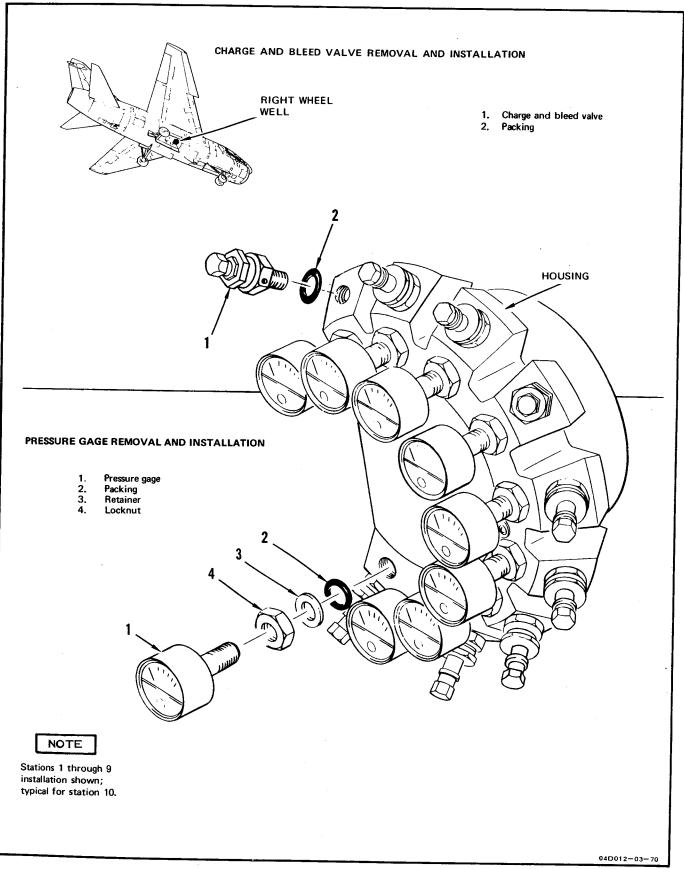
Charge and Bleed Valve and Pressure Gage Removal and Installation
